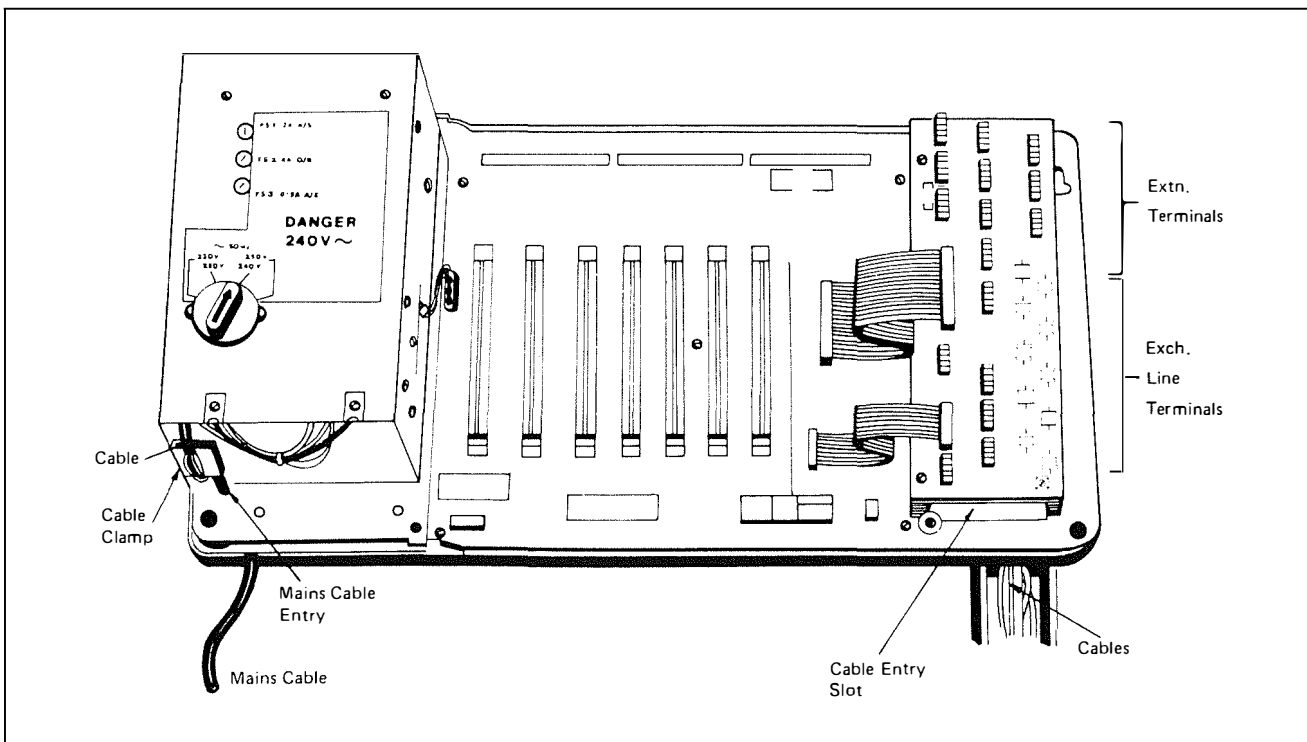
PSU IN POSITION ON REAR MOUNTING ASSEMBLY
